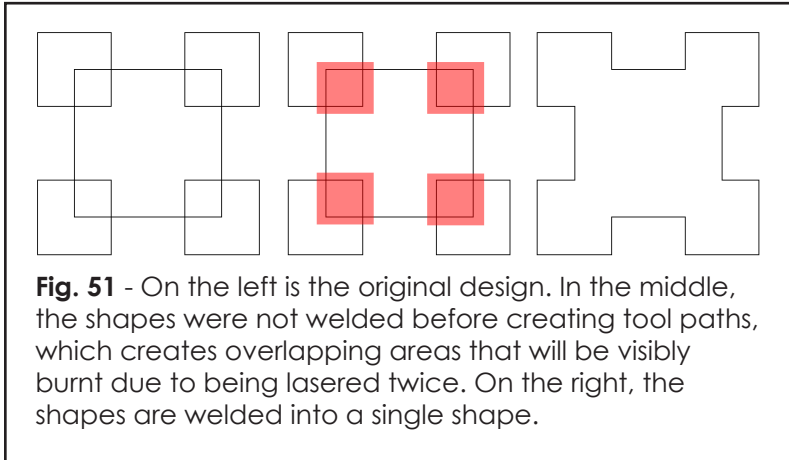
On the left is the original design. In the middle, the shapes were not welded before creating tool paths, which creates overlapping areas that will be visibly burnt due to being lasered twice. On the right, the shapes are welded into a single shape.
